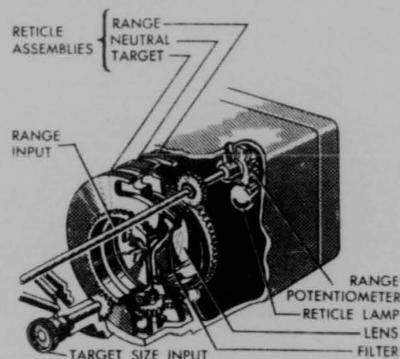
Cutaway View of Reticle Assemblies Showing Detail of Gearing Between Reticles.
